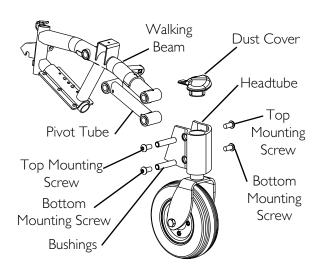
Removing/Installing the Front Headtube Assembly
